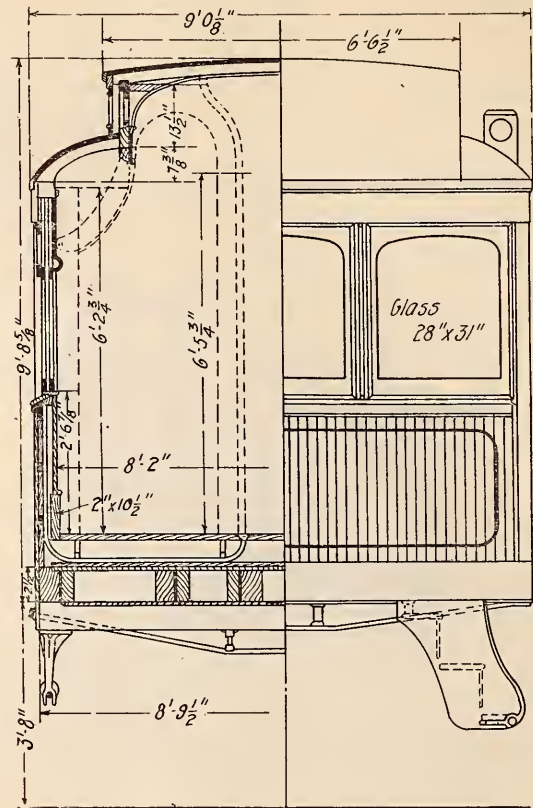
PART SECTIONAL REAR ELEVATION, CONVERTIBLE SLEEPING AND PARLOR CAR.
